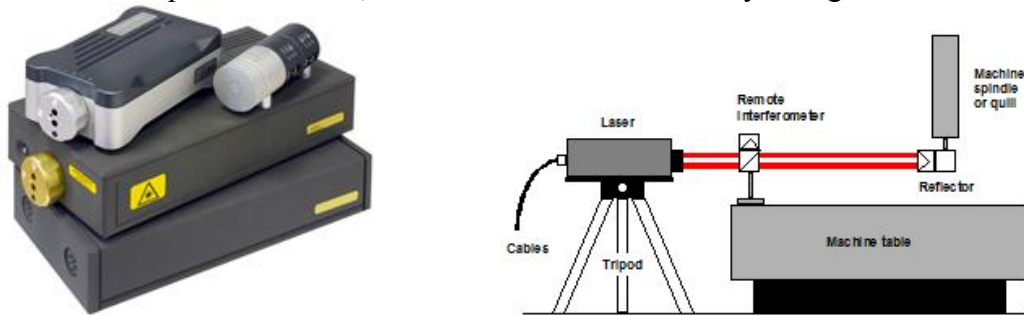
Renishaw XL-80 and ML10 laser head with compensator and at next picture tripod mounted laserinterferometer measurement
